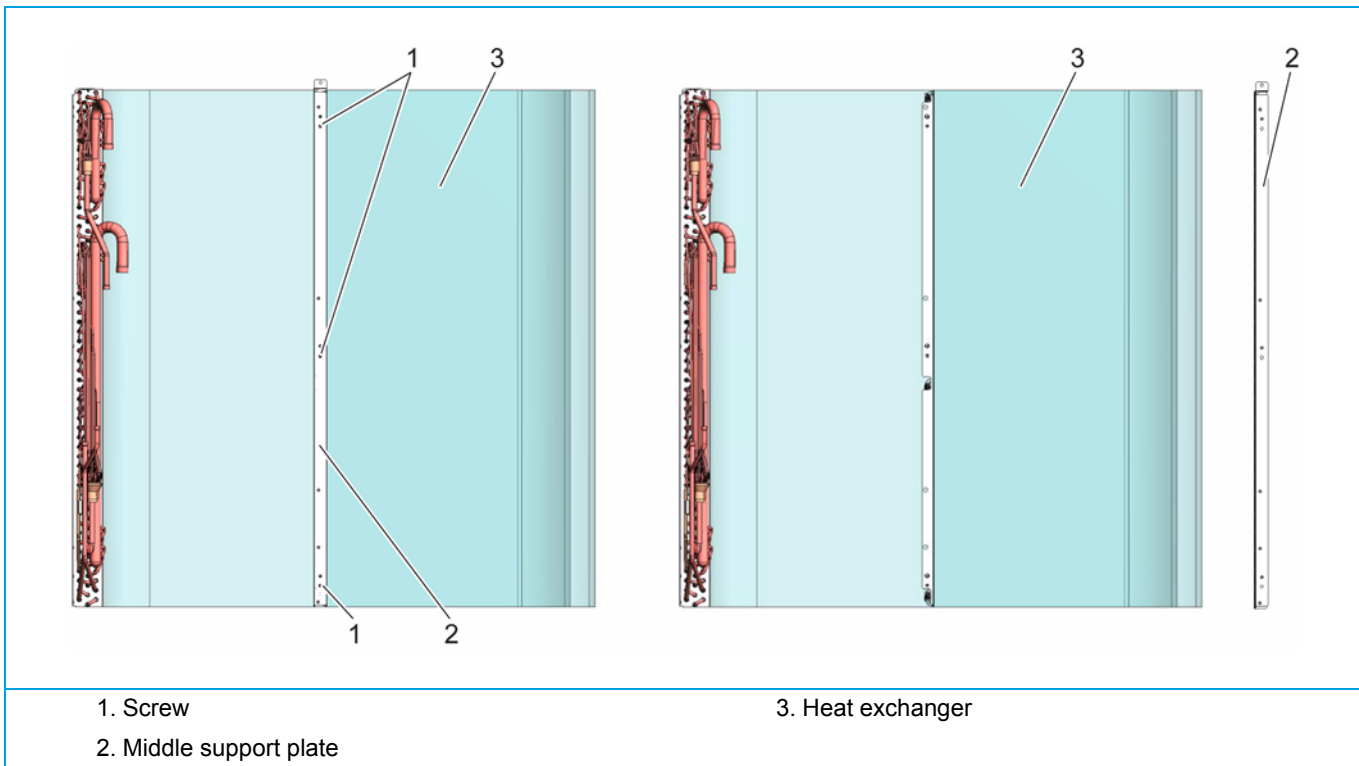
Removing the heat exchanger (REYQ14~20T7Y1B) - 3
